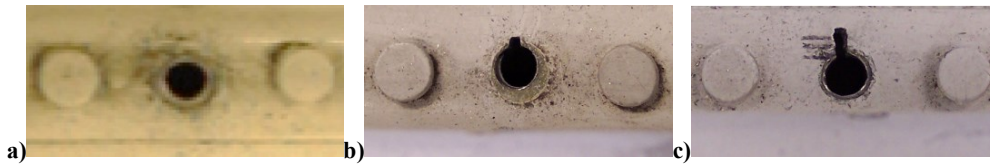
Damage artificially introduced on a rivet hole [40]
